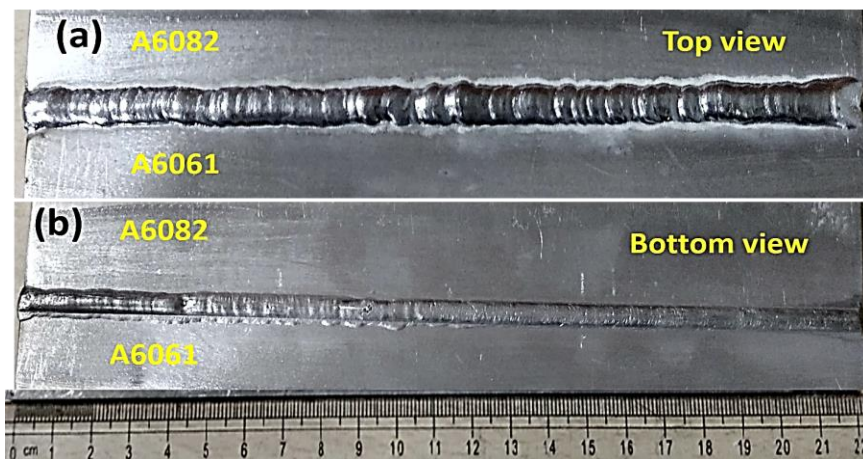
Surface appearance of the CMT welded A6061-T6 and A6082-T6 joint using ER4043 filler wire: (a) Top view and (b) Bottom view
